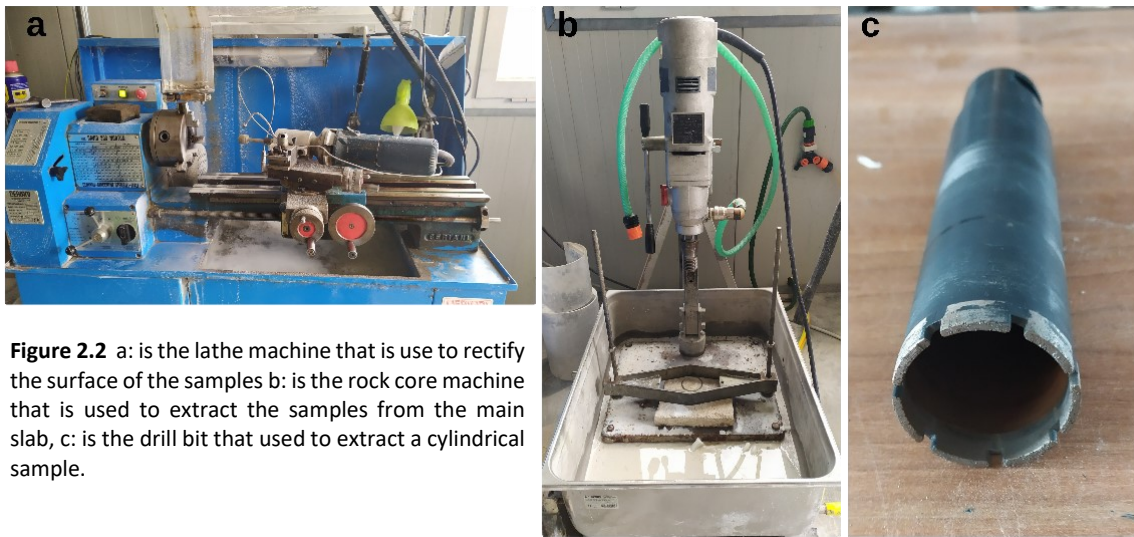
a: is the lathe machine that is use to rectify the surface of the samples b: is the rock core machine that is used to extract the samples from the main slab, c: is the drill bit that used to extract a cylindrical sample.
